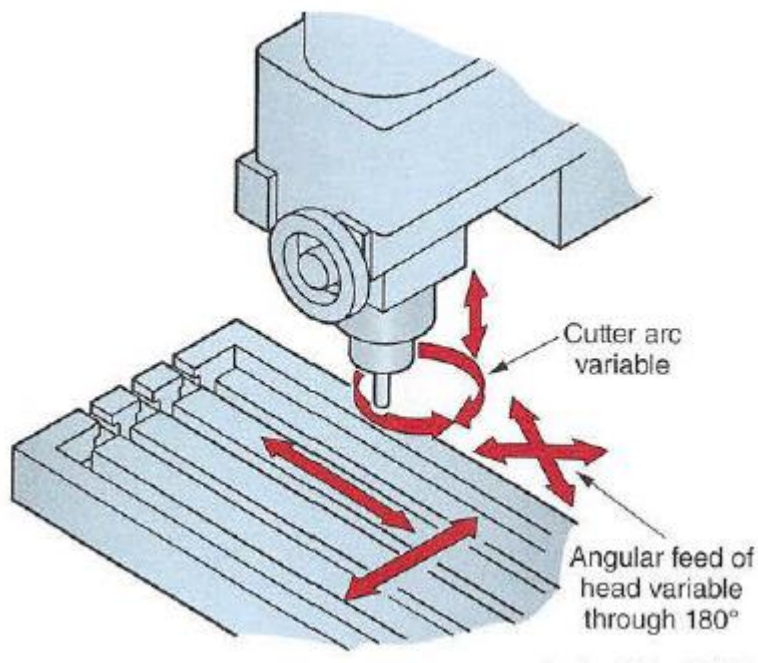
Spindle movements possible on a rotary-head vertical mil ling machine.
